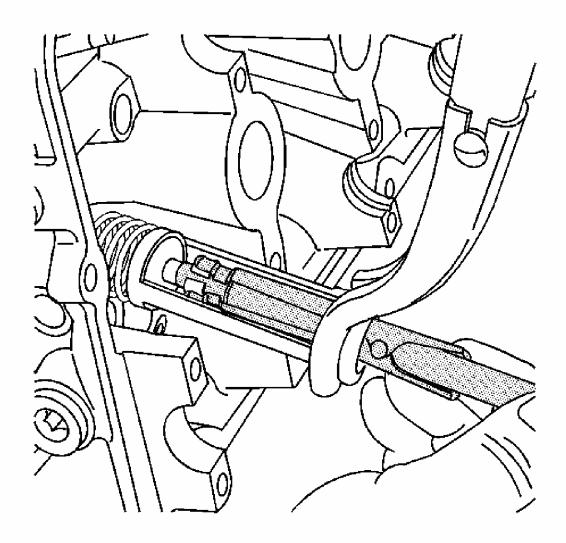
View Of Valve Keepers & J 43059 Courtesy of GENERAL MOTORS CORP.
